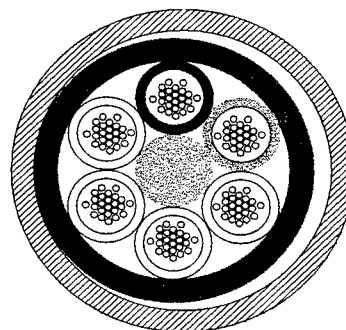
Cable cross section of sewer cable with 144 F and welded corrugated steel jacket
